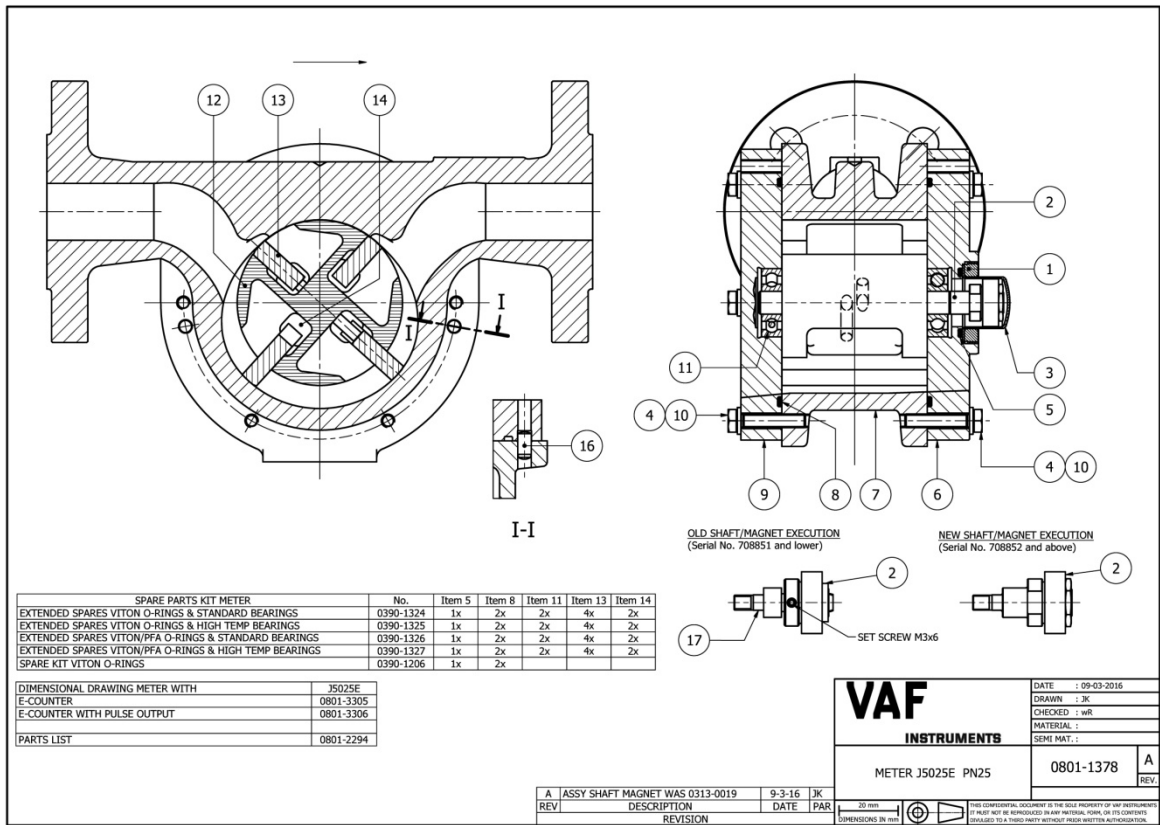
Drawing 0801-1378 – Meter J5025E PN25
